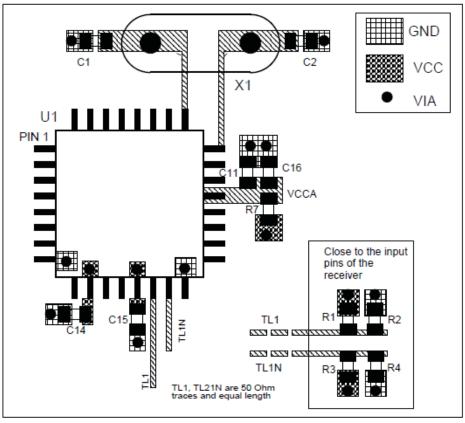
B. PCB BOARD LAYOUT FOR 8432I-51
